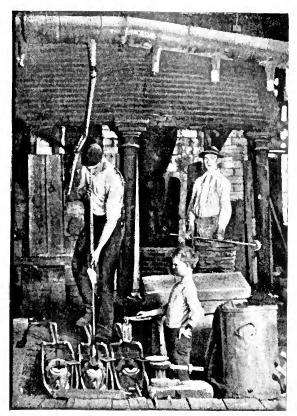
PUTTING THE BOTTLE IN THE MOLD PREPARATORY TO THE FINAL BLOWING.
